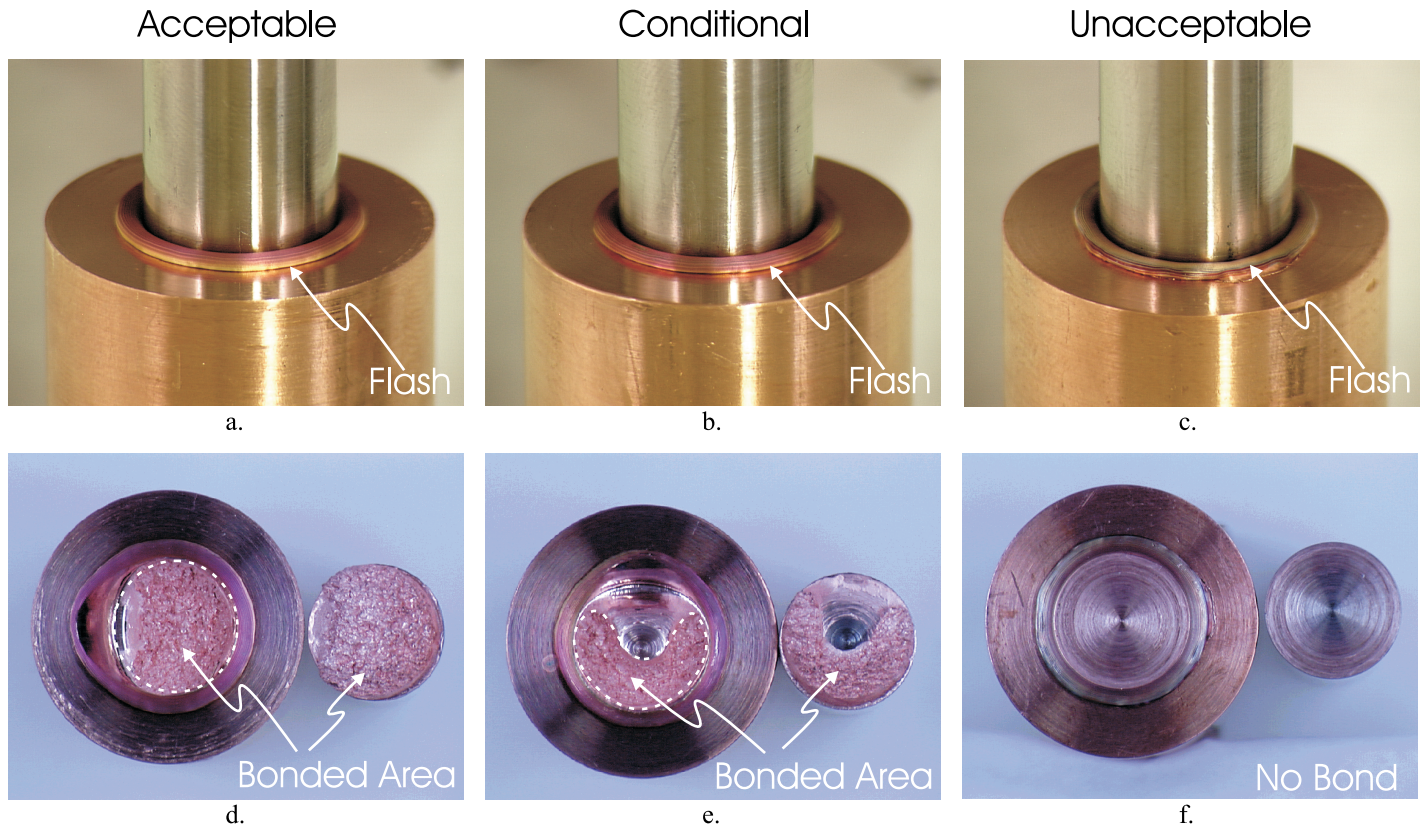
Typical weld flash and fracture surfaces for acceptable, conditional and unacceptable welds.
